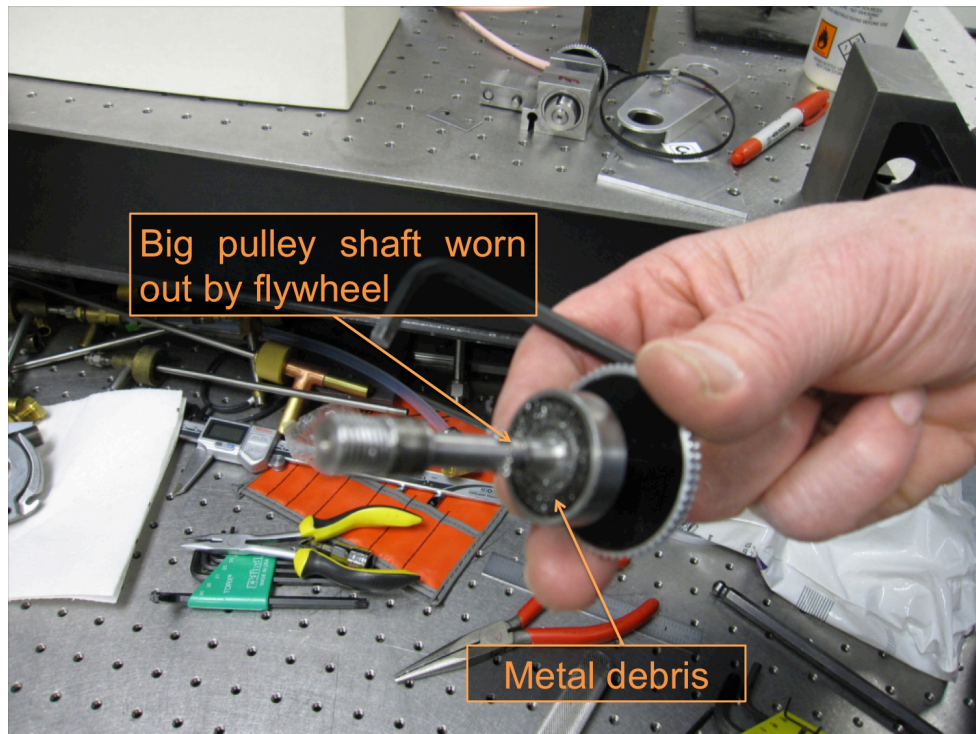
Pulley axis and metal debris caused by friction between the flywheel and the pulley axis. New machined flywheels have a 2 deg bevel to prevent wearing the pulley axis.
